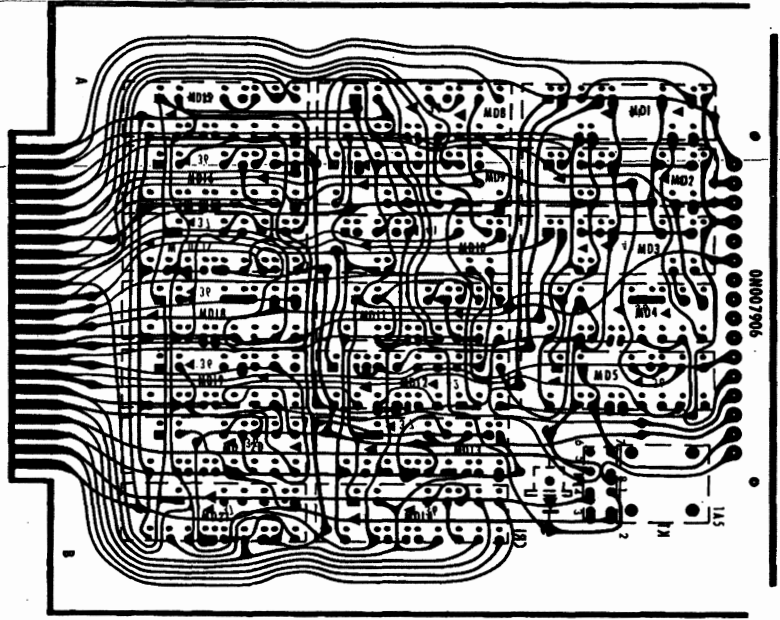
Card E-AJO Printed-Circuit Layout.
